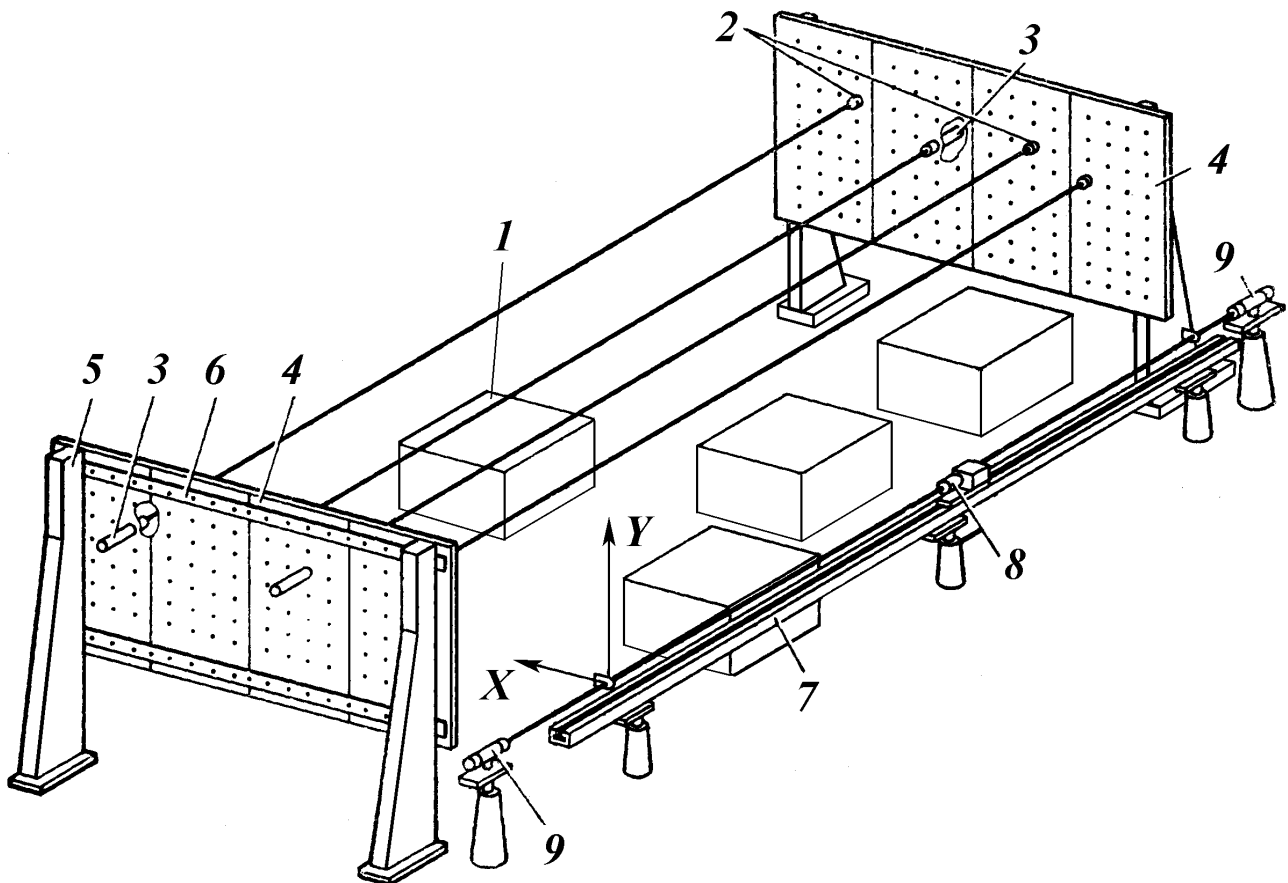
Laser centring-and-measuring system (LCMS) for mounting of the large assembly jigs: 1 – basement blocks of the jig columns; 2 – sighting marks; 3 – laser head; 4 – TCP plates; 5 – risers; 6 – rulers; 7 – longitudinal coordinate ruler; 8 – pentaprism; 9 – laser rangefinder with the reference beam
